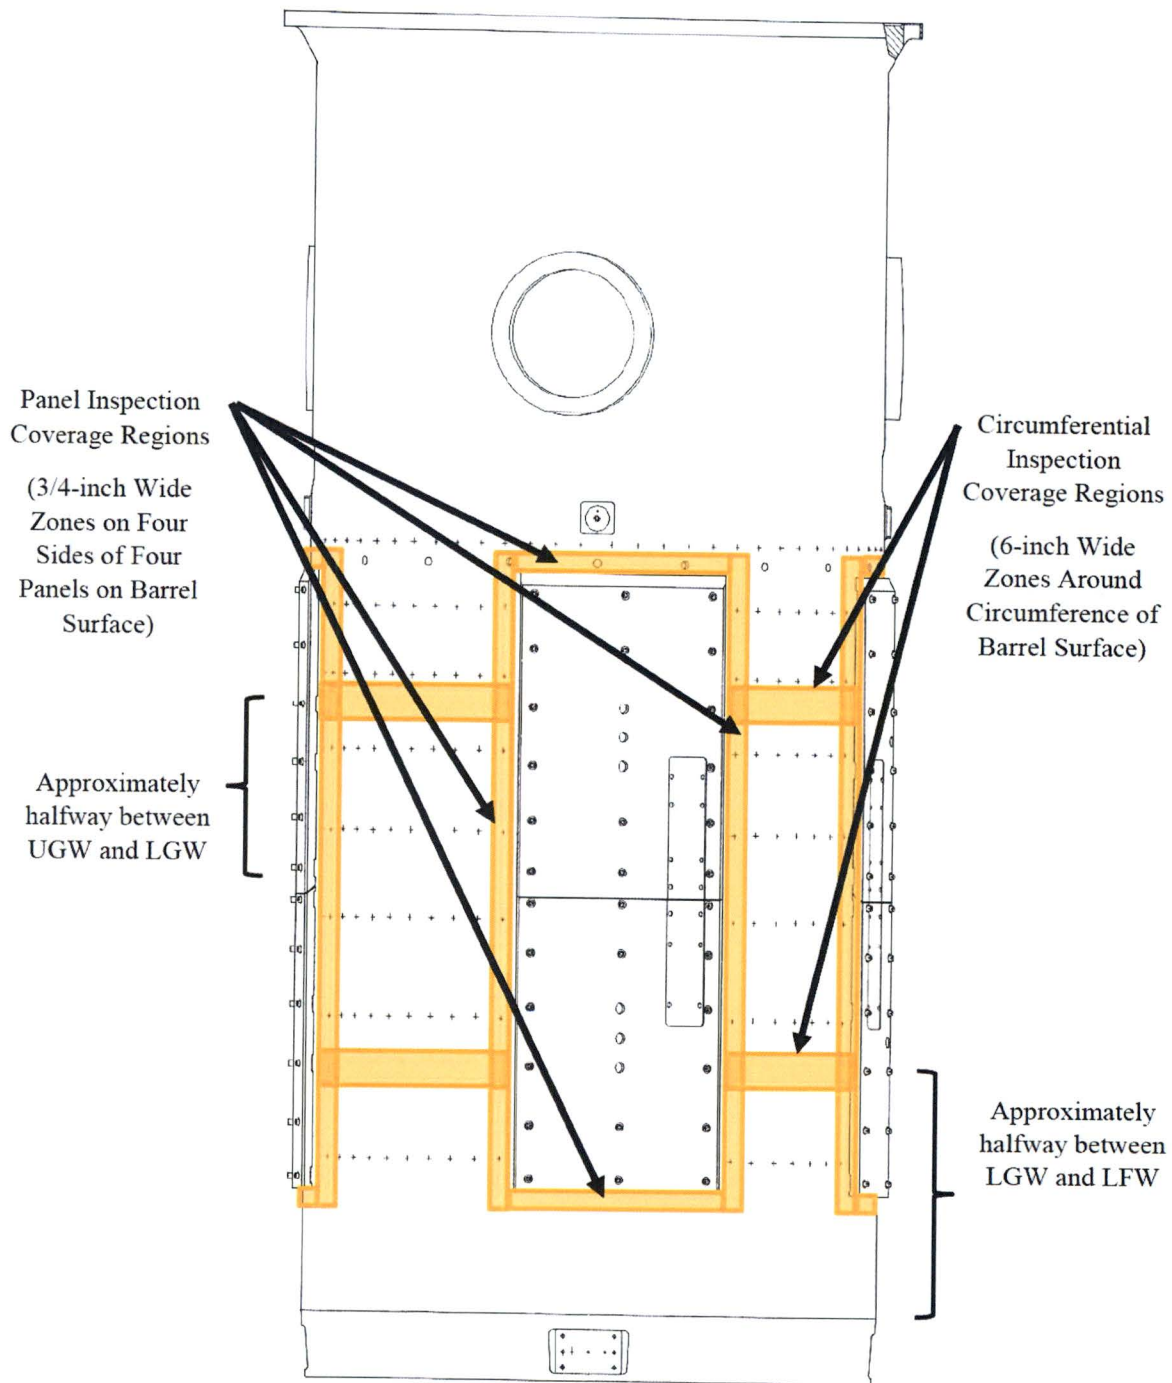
Example of Westinghouse Neutron Panel Inspection Option – Unknown Axial Weld Locations
